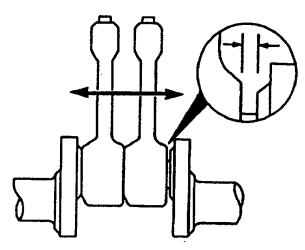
Connecting Rod Side Clearance Measurement.
